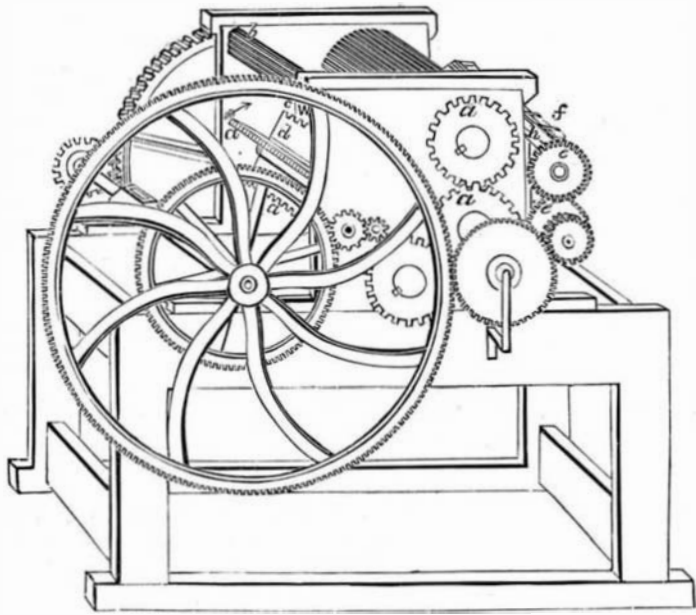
LEFRANC AND NAGOVA'S MACHINE.
